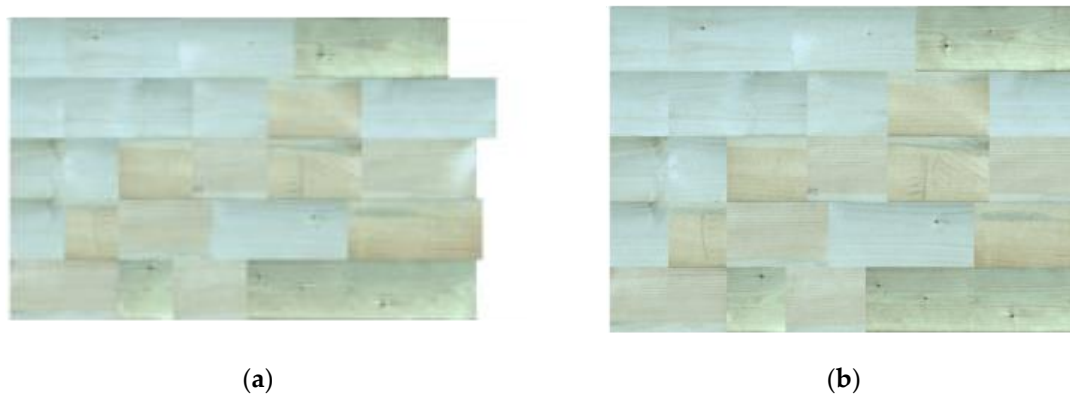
The layout of wood splicing board with standardized pieces. (a) Board spliced by row. (b) Rectangular board.
